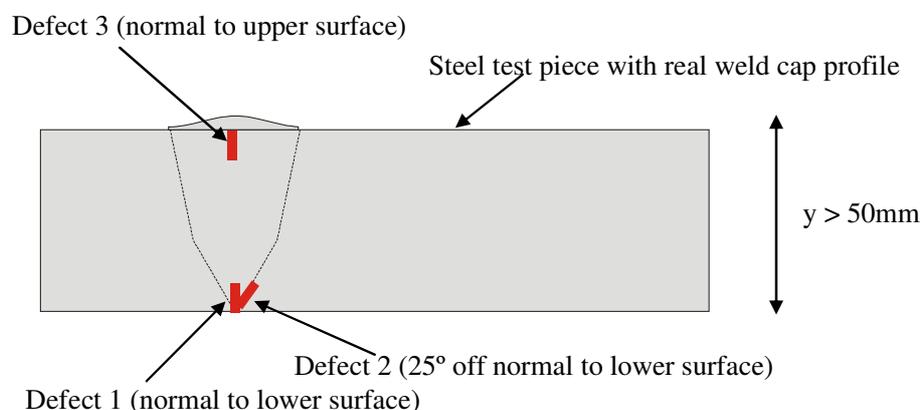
Steel test piece showing defect locations and real weld cap surface profile
